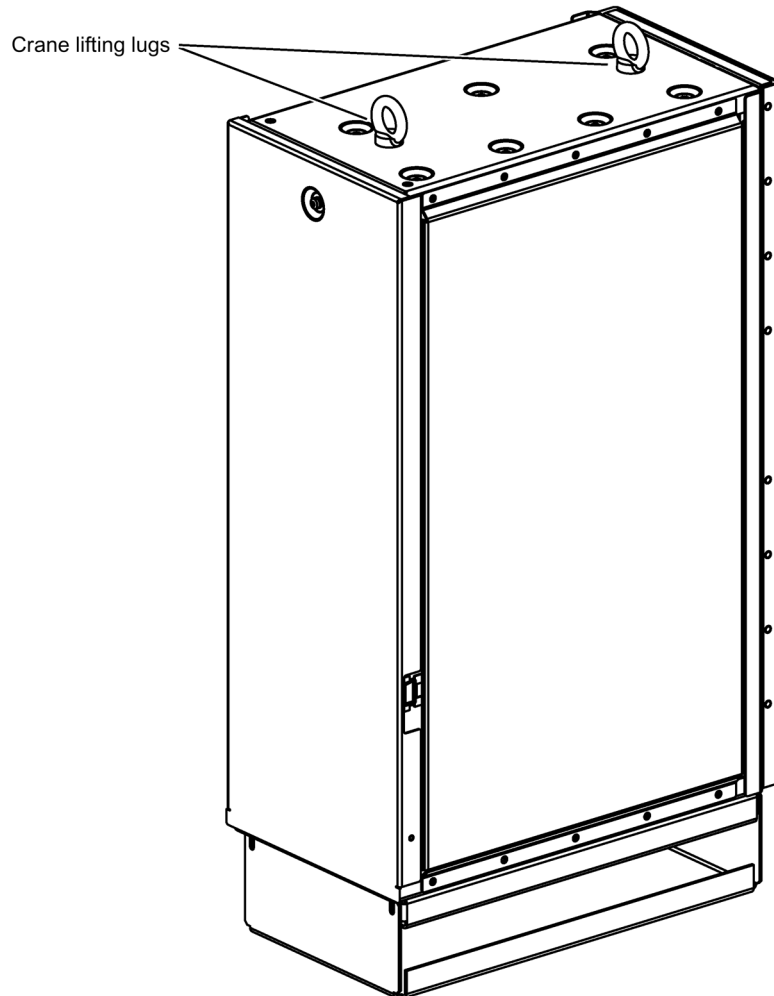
Crane lifting lugs/screw coupling points to mechanically support the filter module
